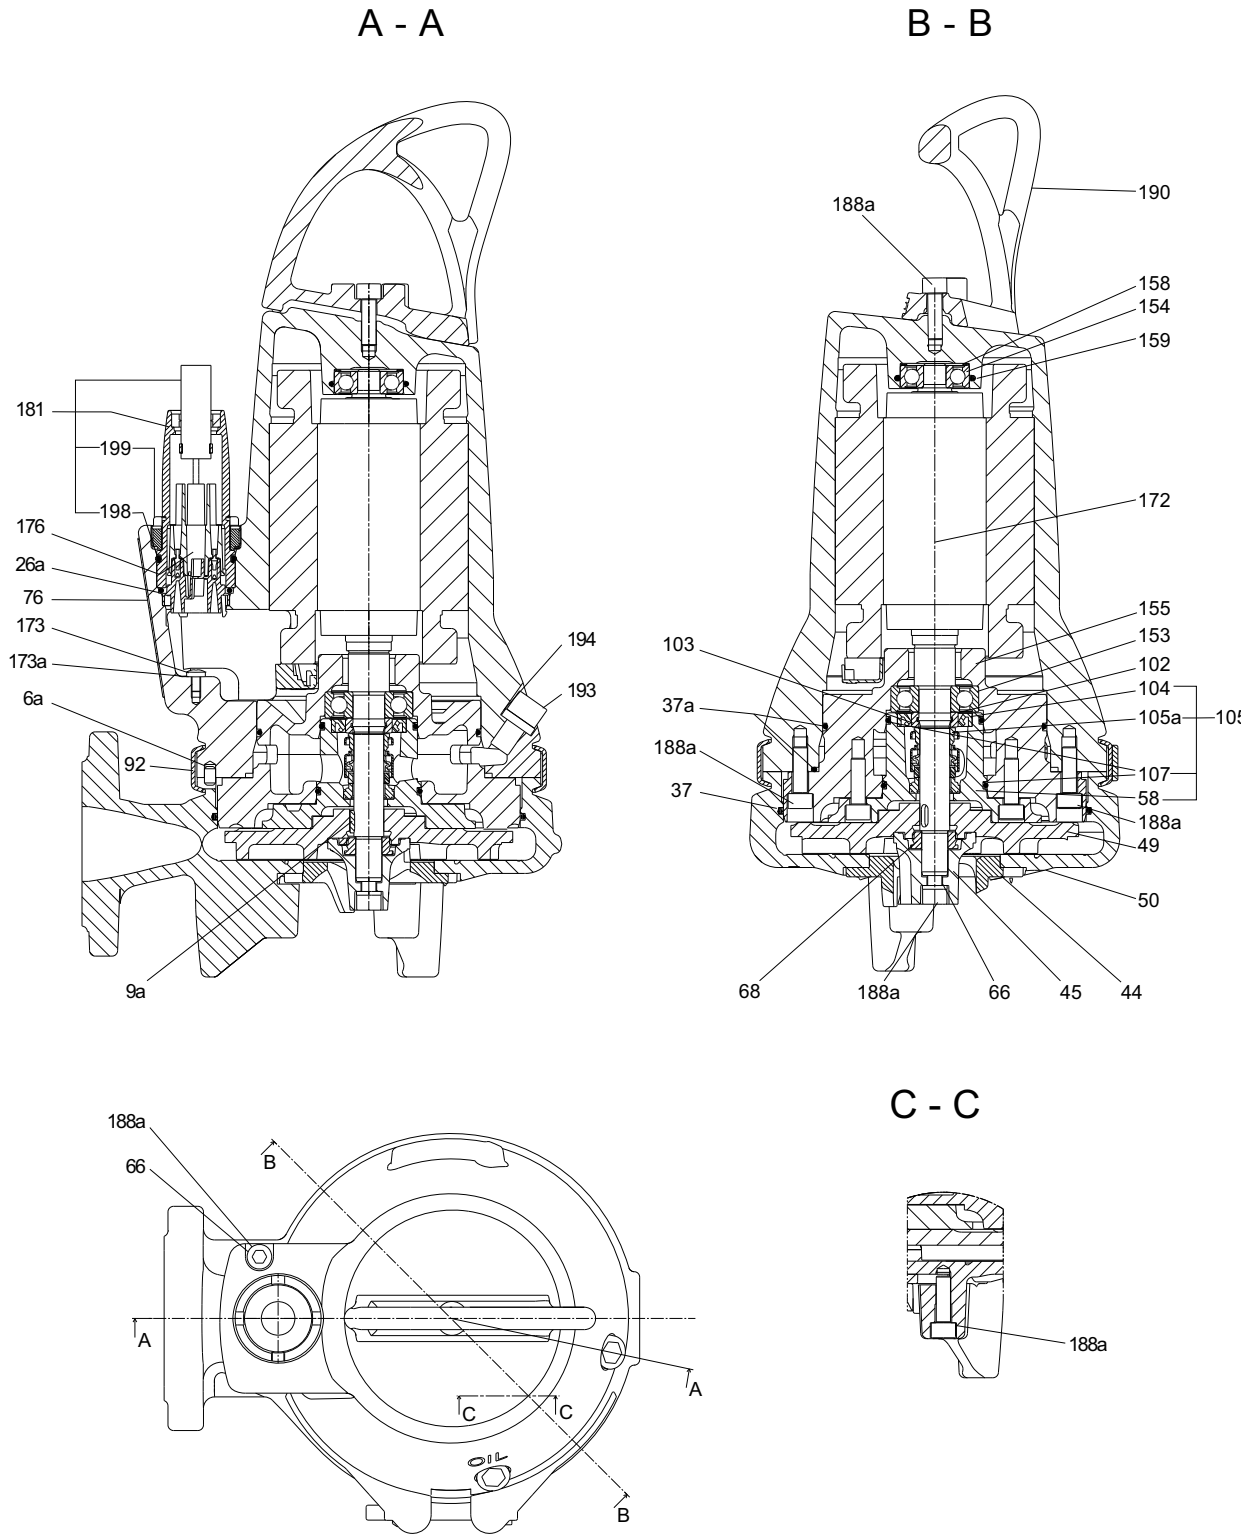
Sectional drawing of SEG pumps, 2.0 hp (1.5 kW)
